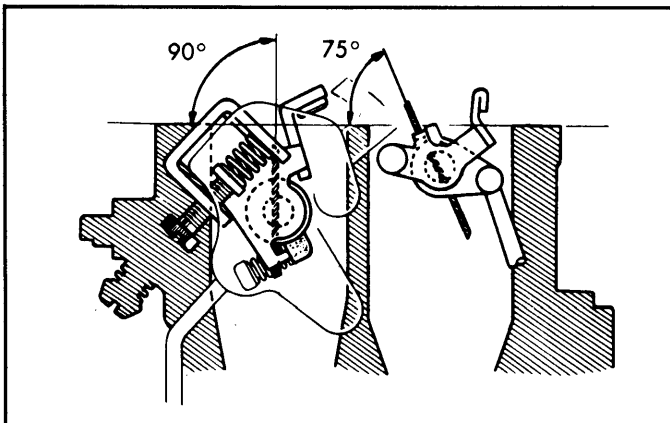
Primary & Secondary Throttle Valve Adjustment
